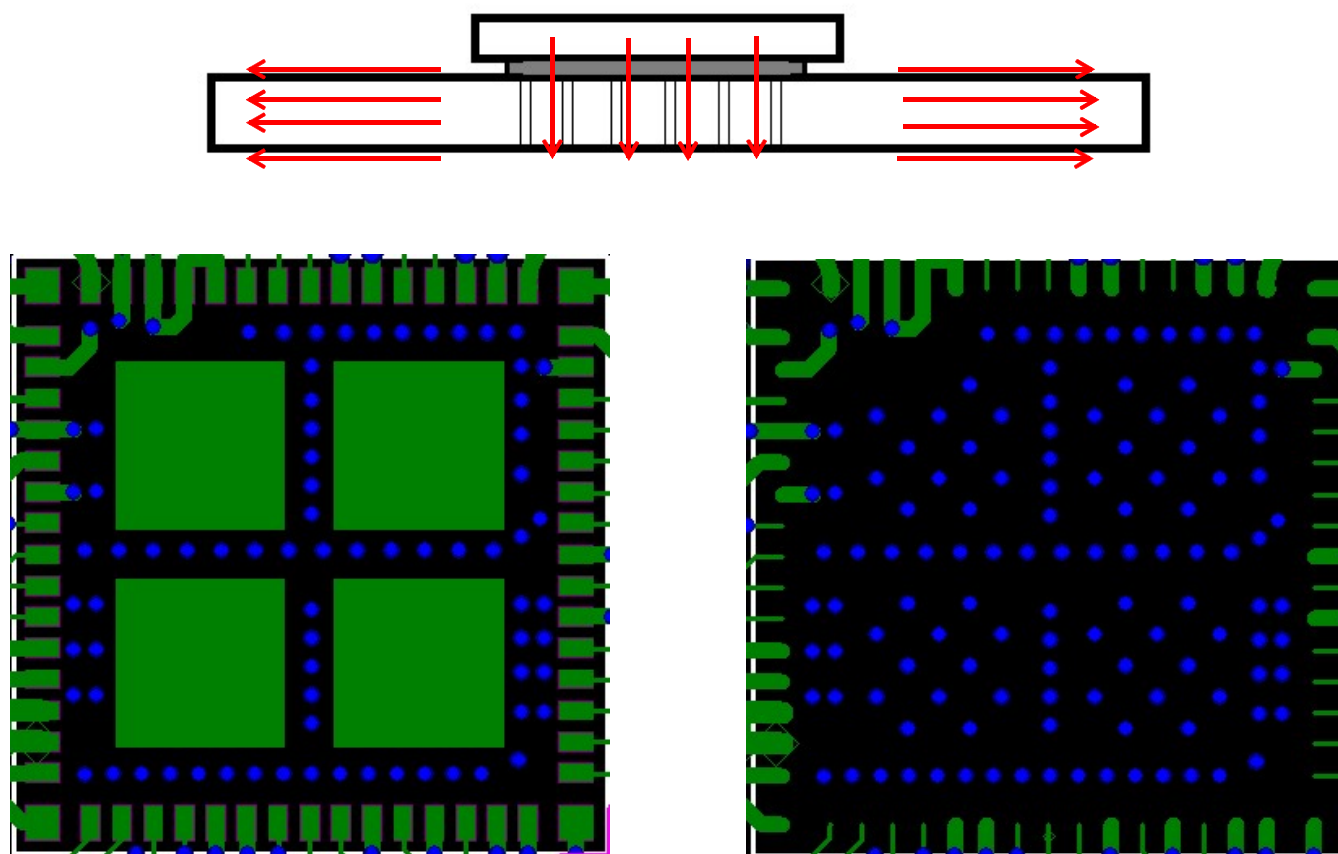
Block of Ground Pads on Bottom Side of Package
